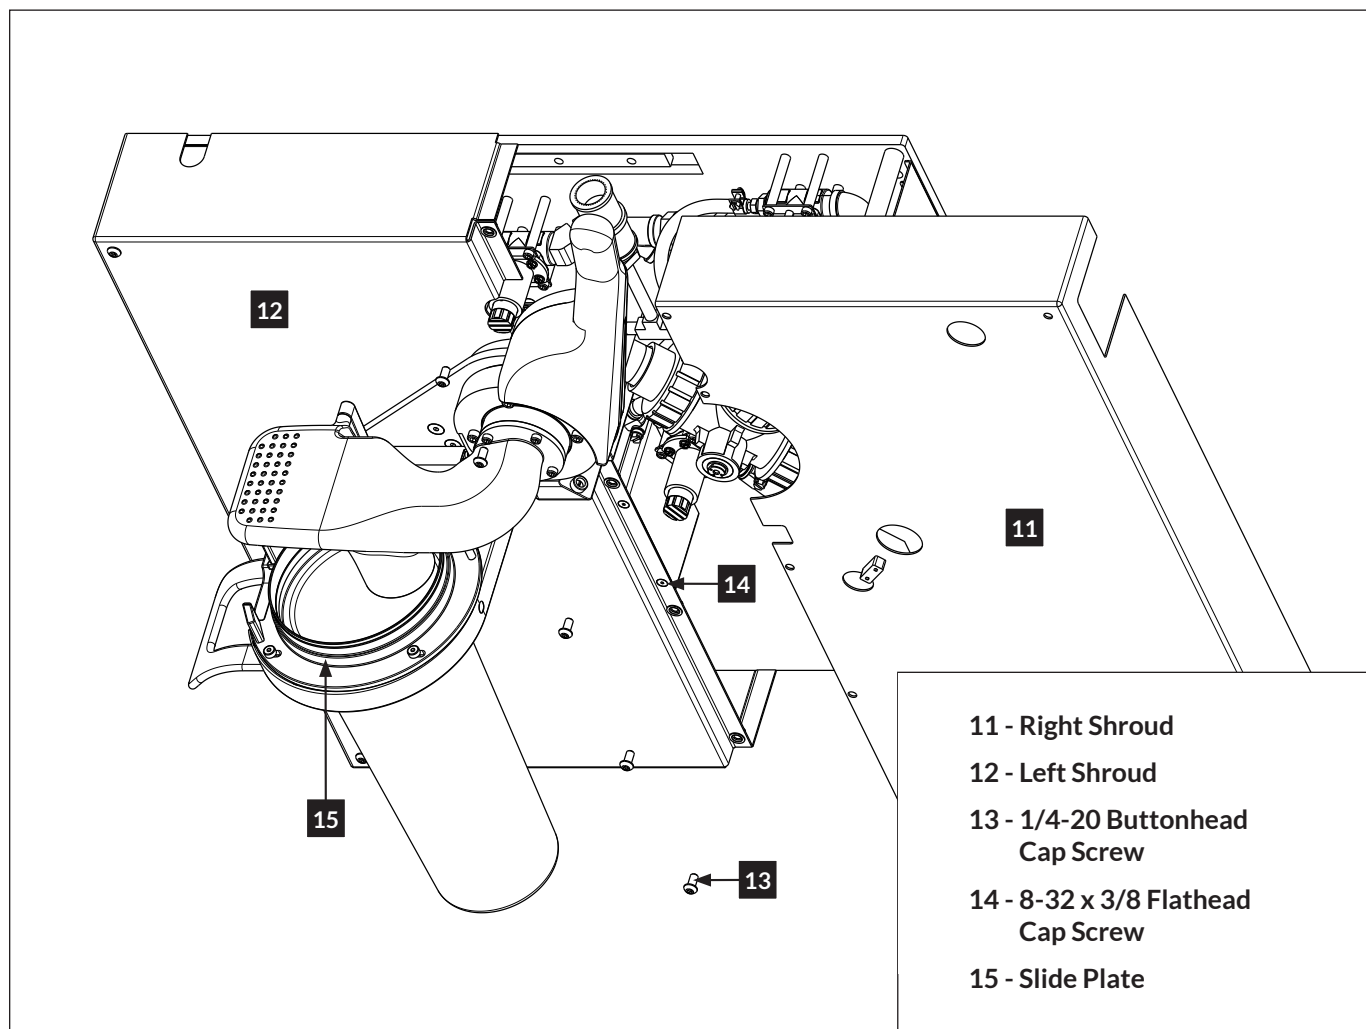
DRAINHEAD AND FLANGE SUB-ASSEMBLY COMPONENTS
